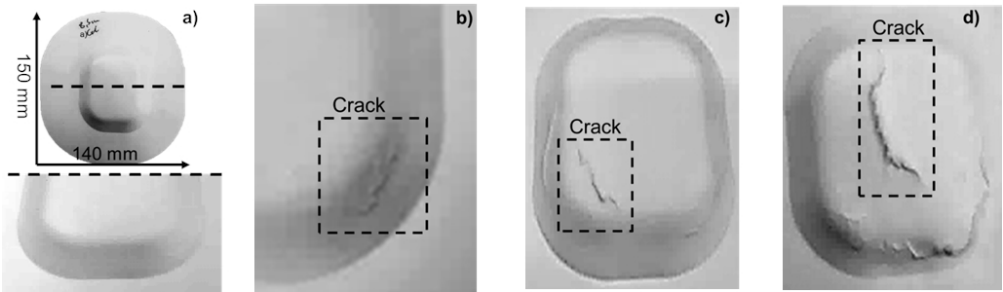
The fracture behaviour of the formed parts compared with parts without cracks (a), with a crack in the top layer at the flange (b), with a crack through several layers on the top (c) and with a crack through the whole thickness (d)
